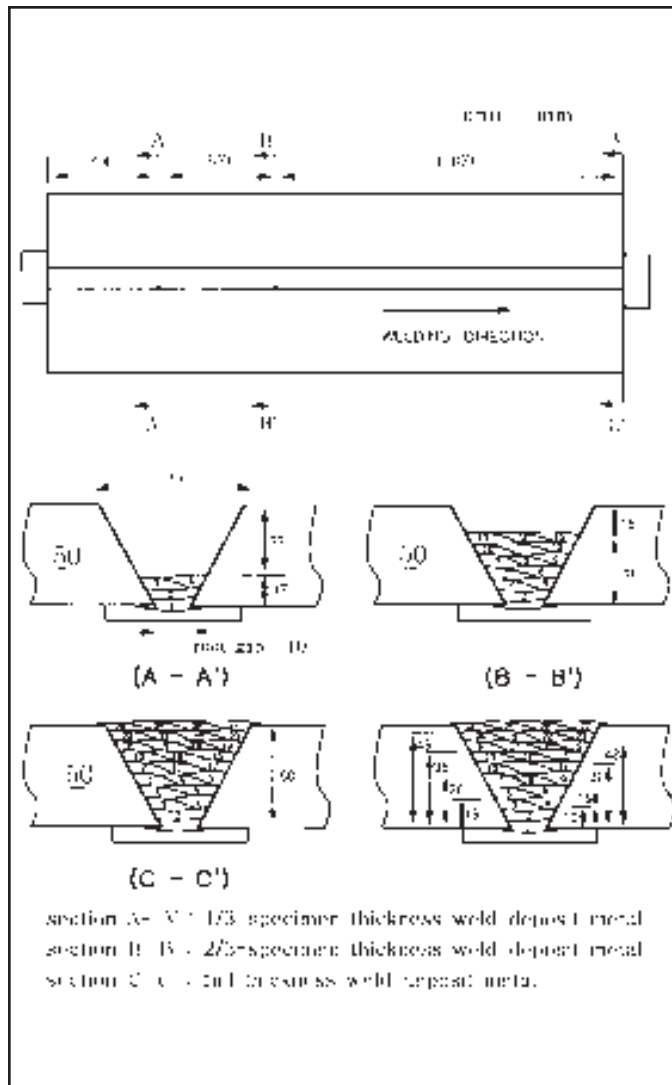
Schematic diagram of weld deposit metal for the FCAW process. A-A' — $\frac{1}{3}$ -thickness of deposited weld metal; B-B' — $\frac{2}{3}$ -thickness of deposited weld metal; C-C' — full thickness of weld deposit.
